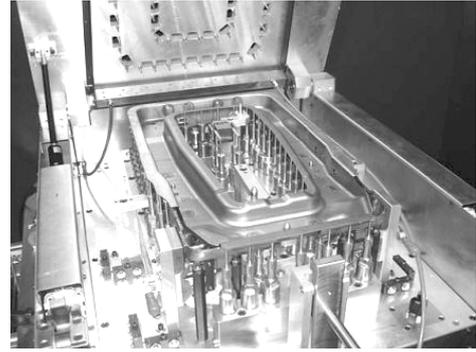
Clamping tool for laser remote welding with hydraulic support pins for exact zero gap clamping of all welds at the same time
